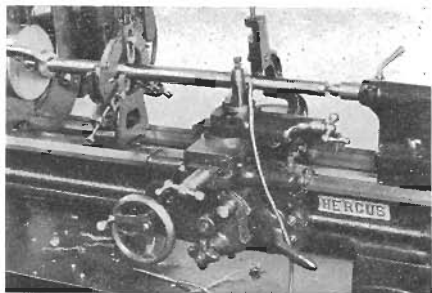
Turning a Shaft supported by both Fixed and Travelling Steadies
